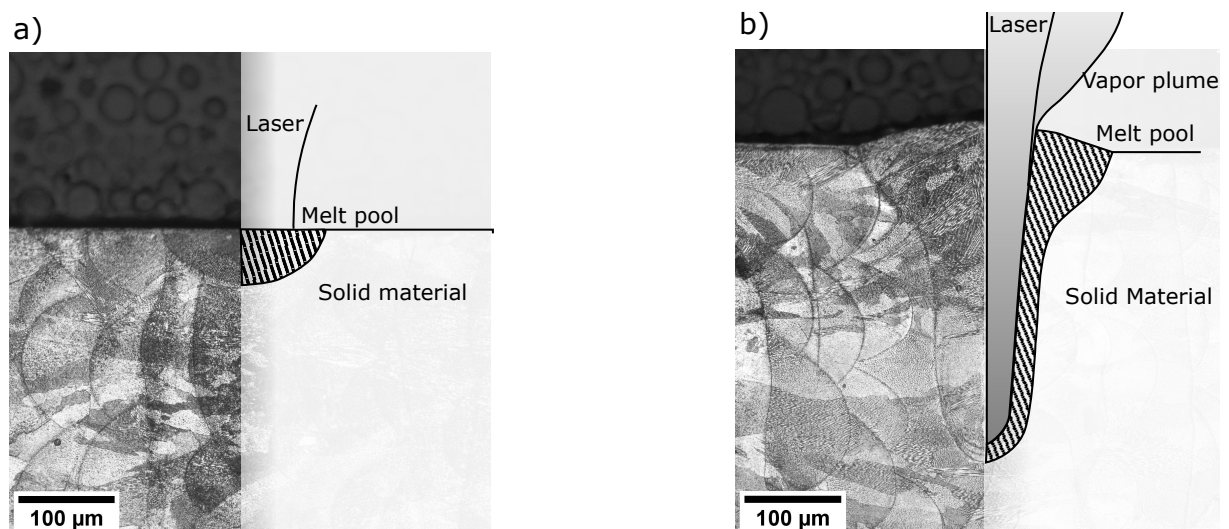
Schematics of welding modes with micrographs of corresponding melt pools; a) conduction welding and b) keyhole welding, material is IN718
